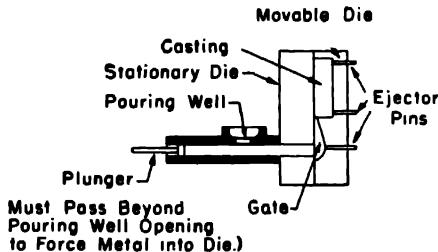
Sketch of cold-chamber pressure machine. The plunger, cylinder, and die carriage are parts of the same machine. The melting pot and metal container are separate.
